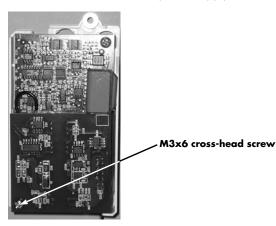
Remove one (1) M3x6 cross-head screw.
